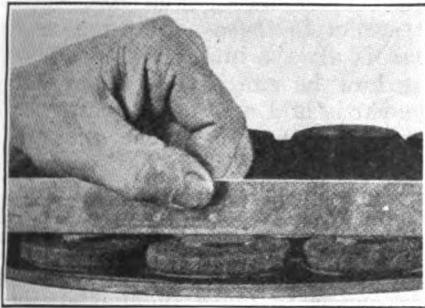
THE COIL SUPPORT ASSEMBLY
